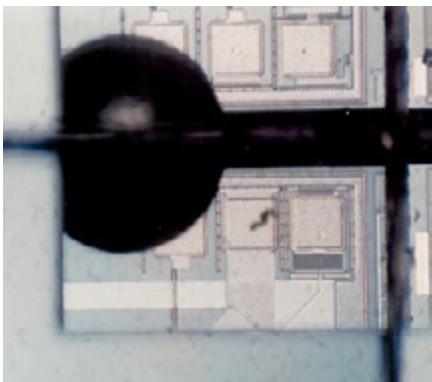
Solder ball formed during wafer bonding and extending into the bond pad area.
